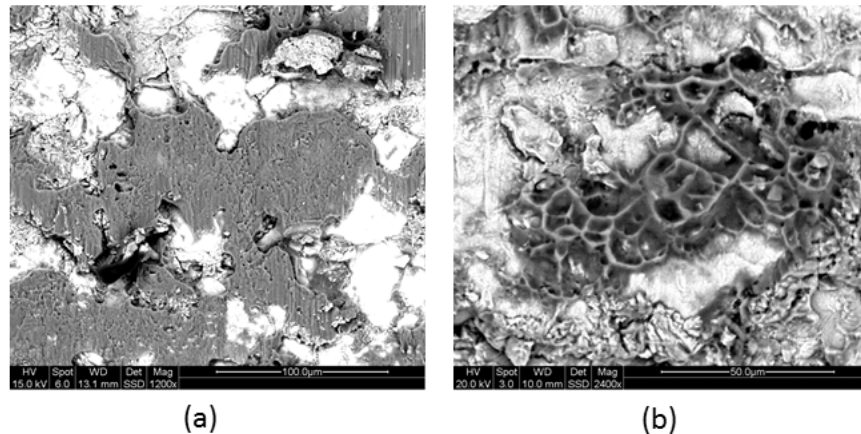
Steel side of ductile fracture surfaces of AA6111-T4/JAC980 from (a) lap-shear mechanical testing and (b) peel mechanical testing. Darker areas represent aluminum.
